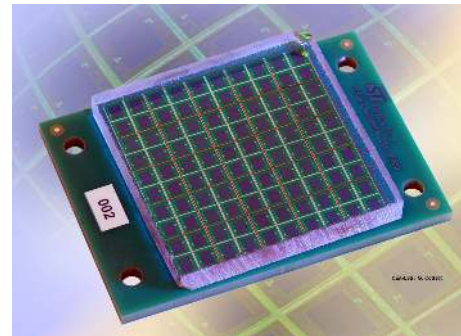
Photonic module assembly with equivalent TSV chips and LYSO-like scintillator crystal slab.
